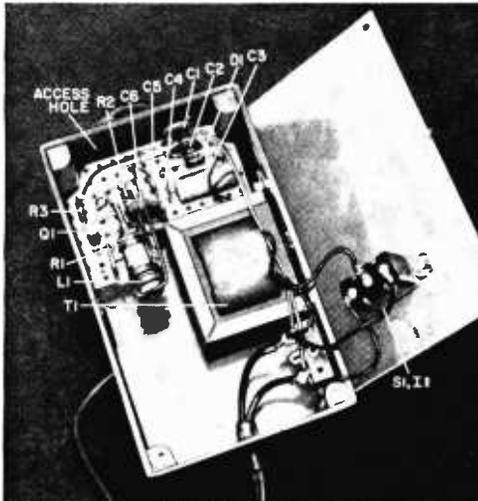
Transmitter parts layout is not critical, but avoid excessive component lead length to prevent shorts between the a.c. and d.c. voltage sections.
